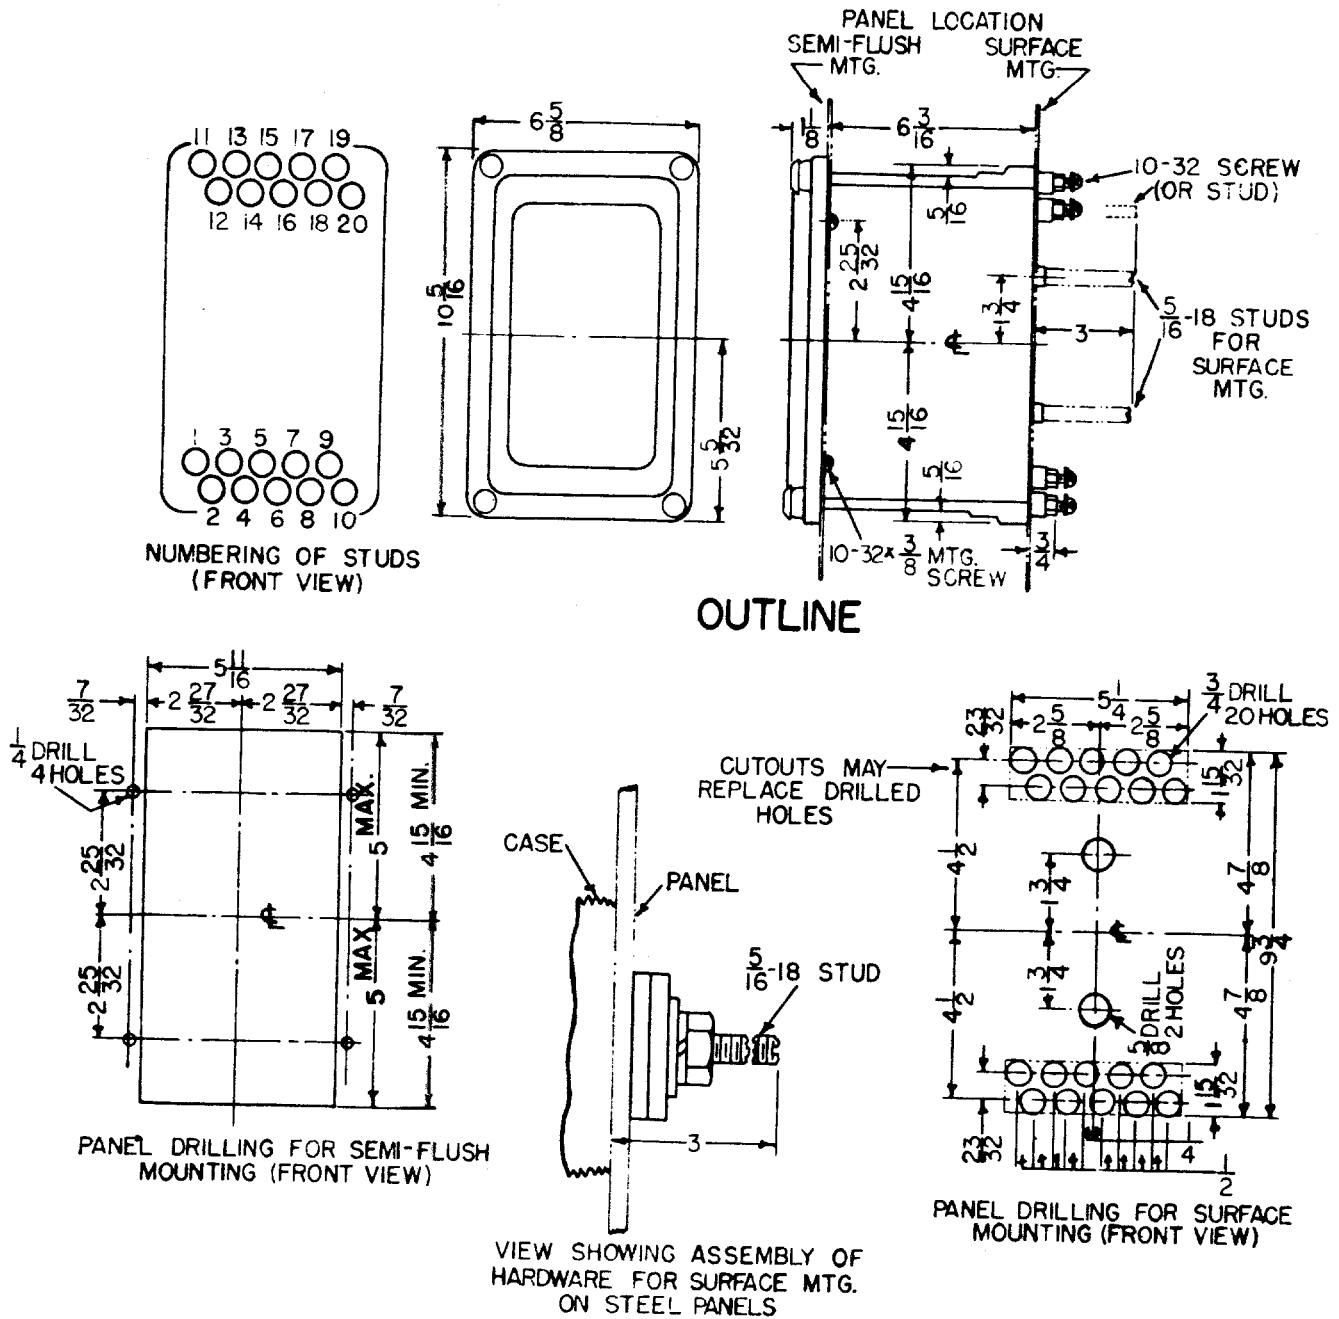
(6209272-2) Outline And Panel Drilling Dimensions For The HLA11A and HLA11B Relay
